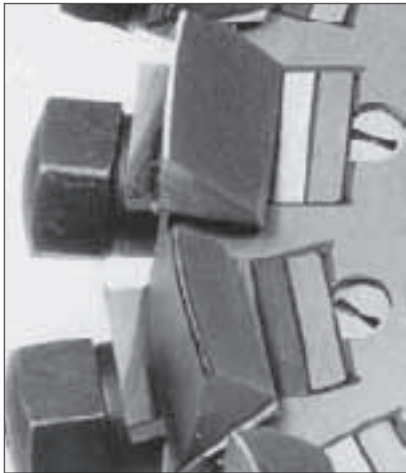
Inserted blade face mill cutter with alternate inside and outside blades.
